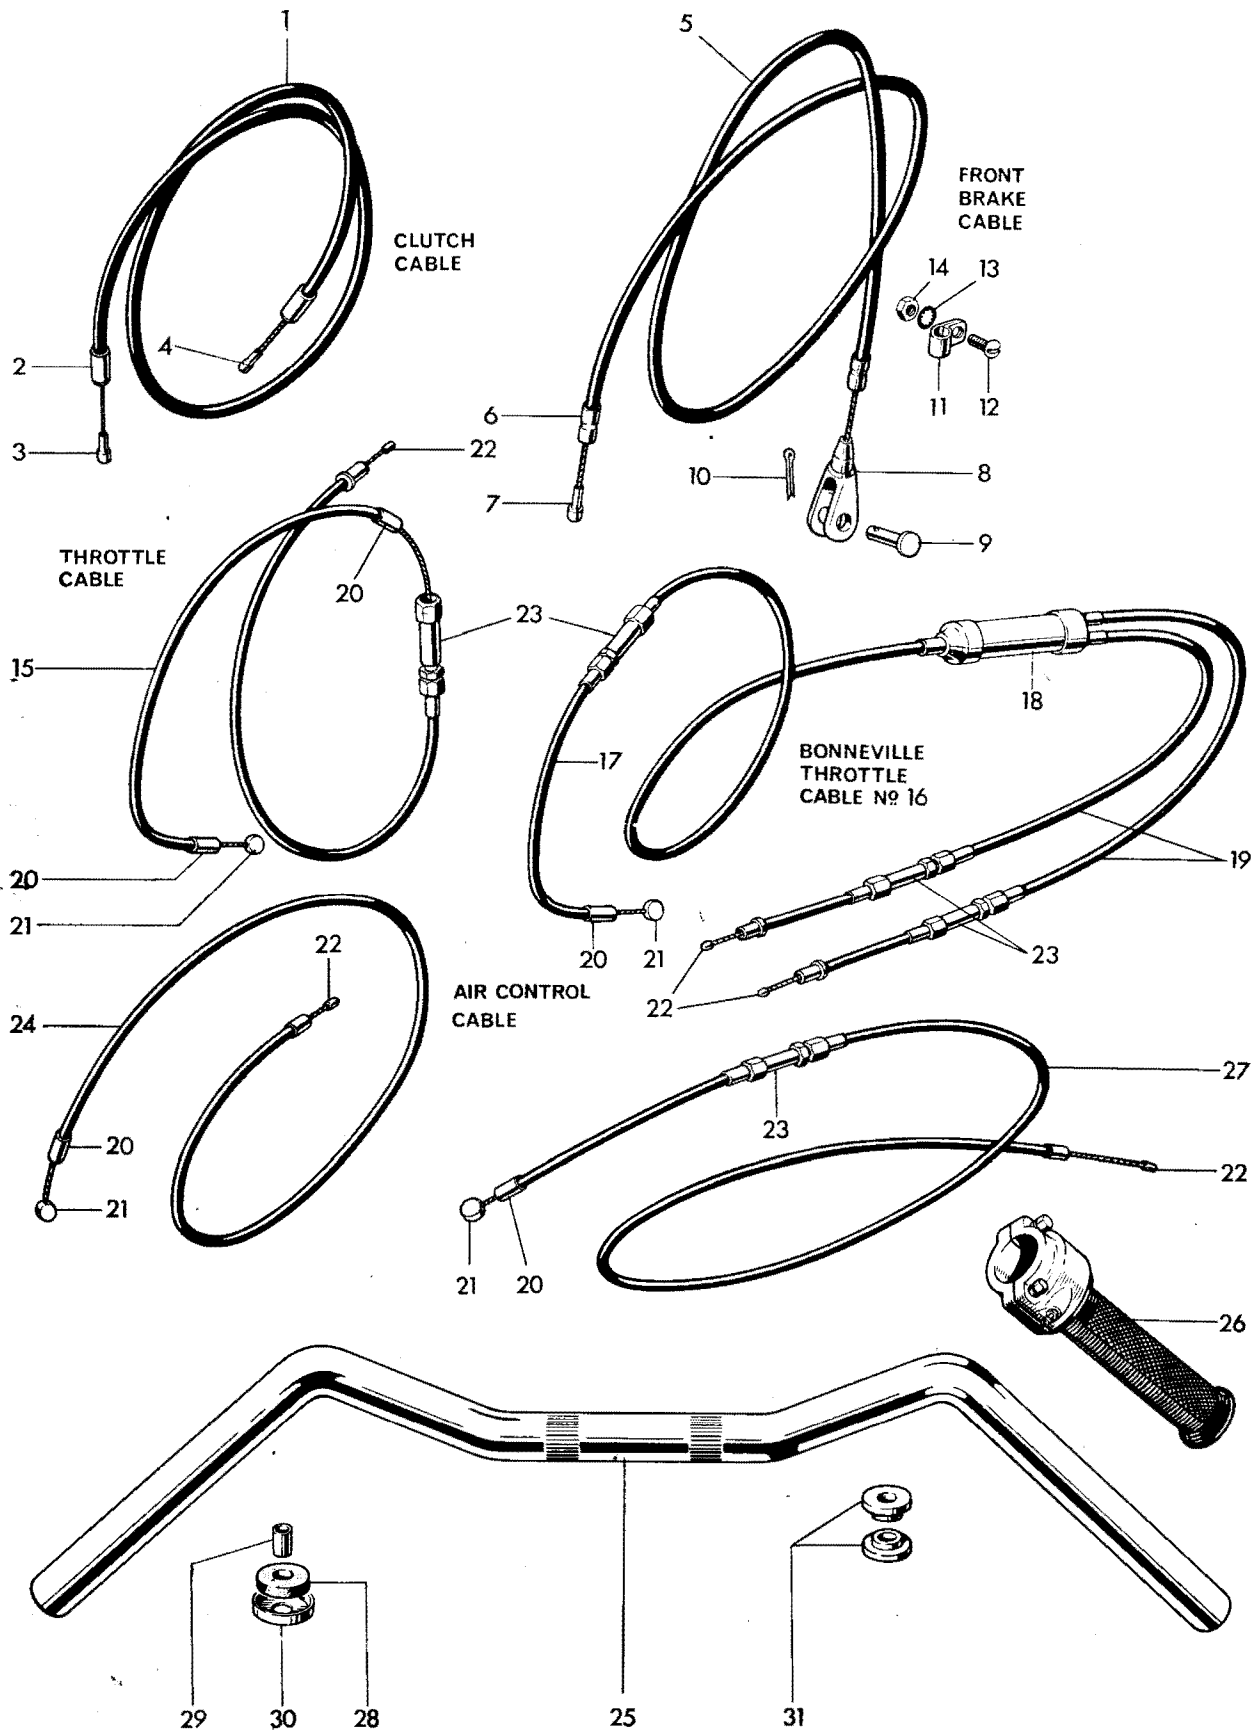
CONTROL CABLES AND AMERICAN HANDLEBARS
